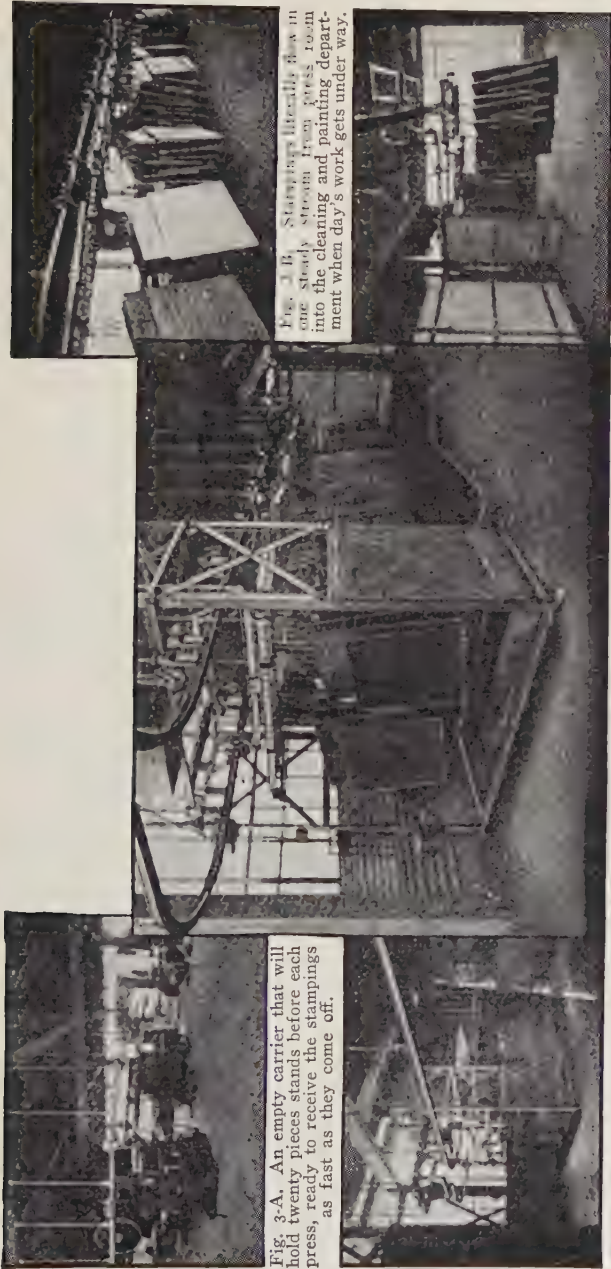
A. An empty carrier that will hold twenty pieces stands before each press, ready to receive the stampings as fast as they come off.
